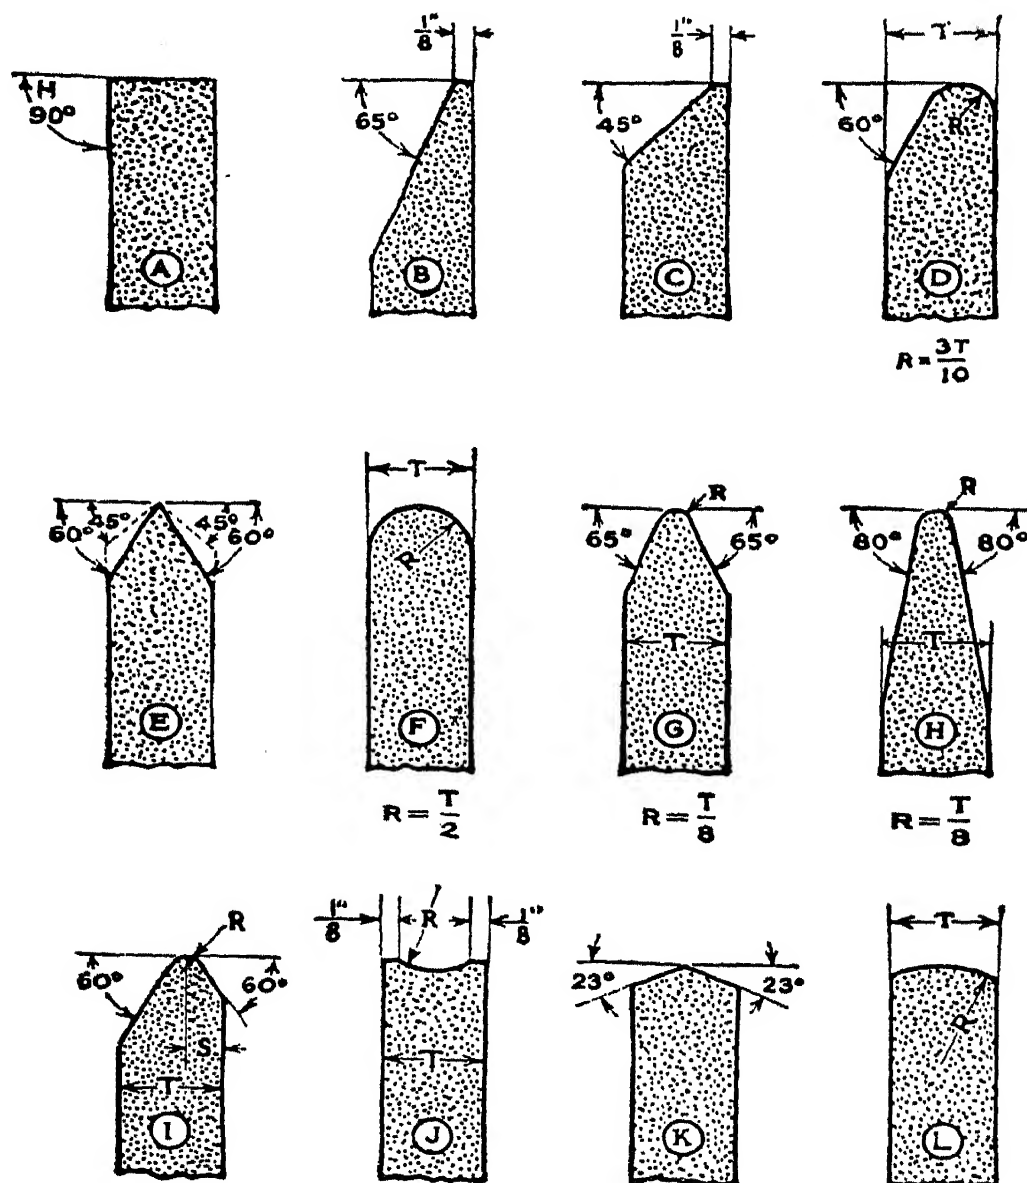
Standard grinding wheel faces. (Courtesy The Carborundum Co.)
